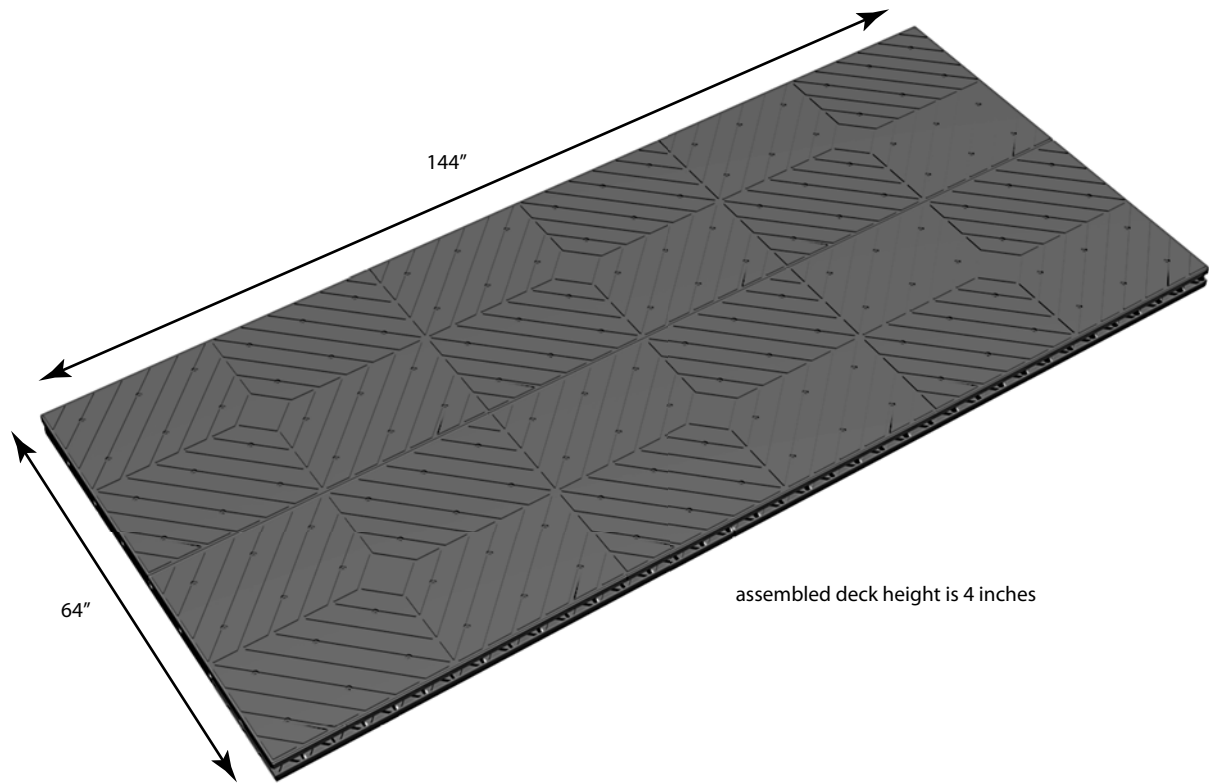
This shows the panels assembled into a 144" x 64" deck but not yet bolted.
